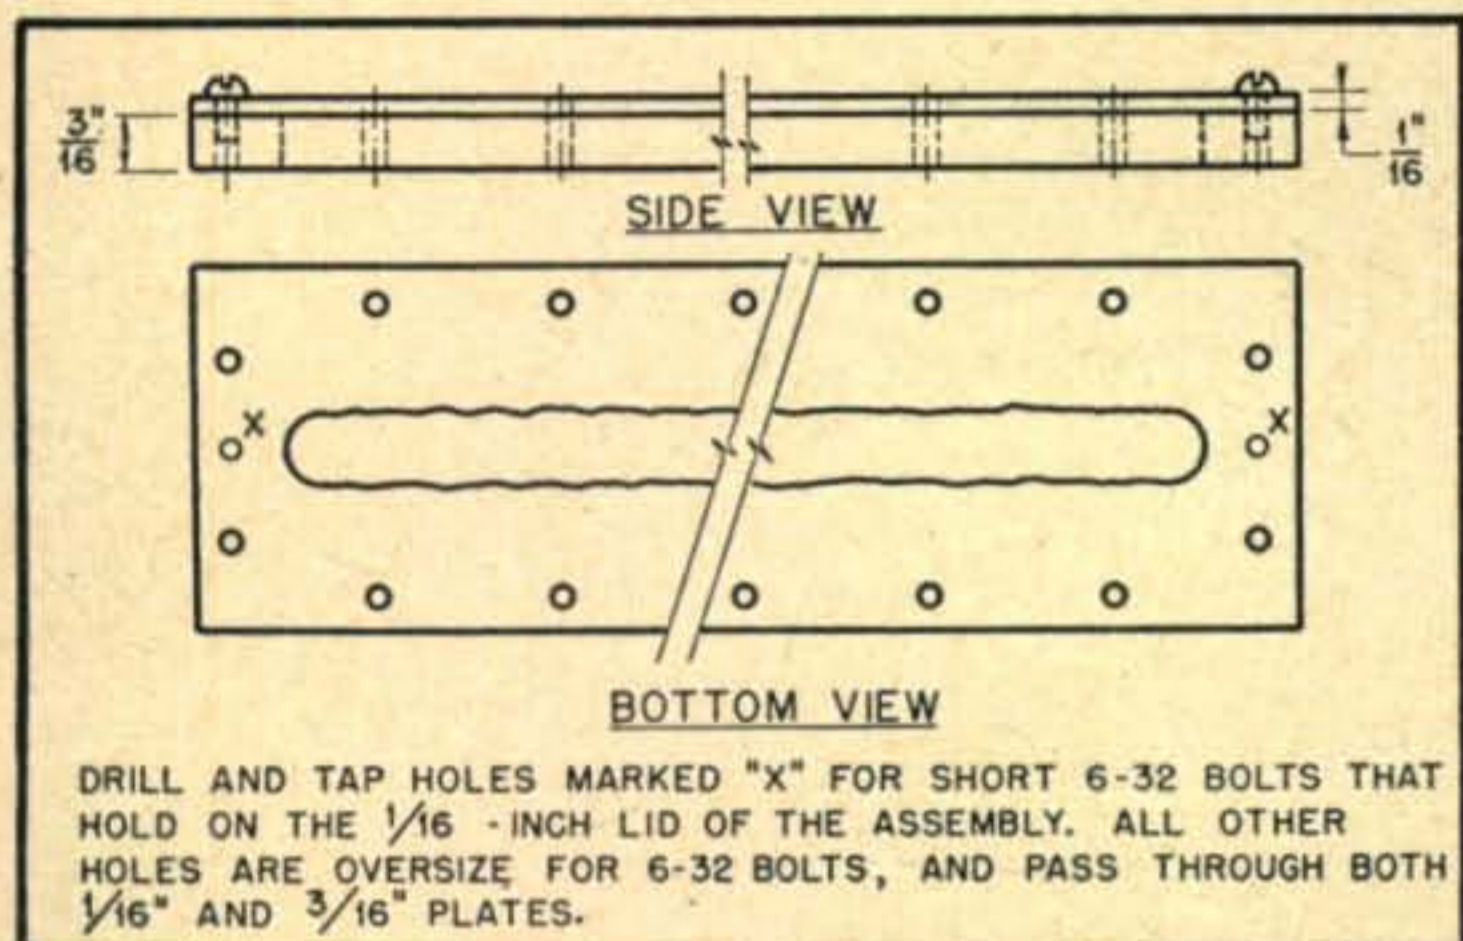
Home-made hinge cover plate. This has the advantage of doing away with machine work.
